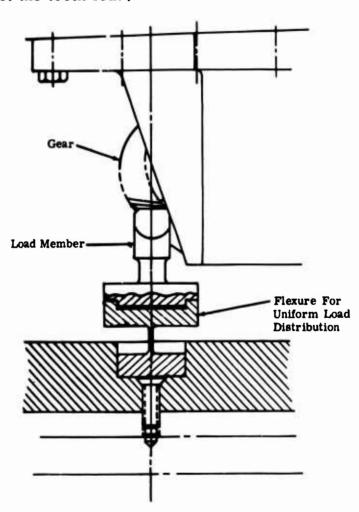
Test Rig Installation Showing Load Member Flexure Device.
